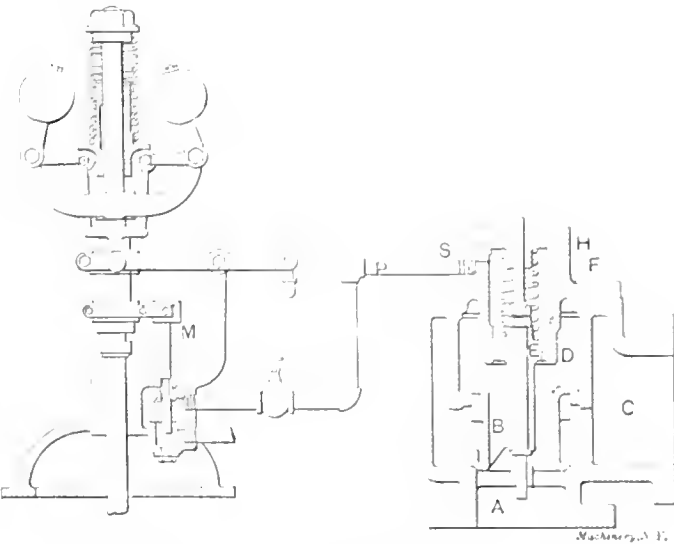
Valve for Admitting High-pressure Steam to Low-pressure End of Turbine
